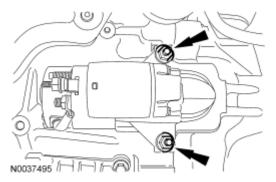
Locating Starter And Stud Bolts Courtesy of FORD MOTOR CO.
